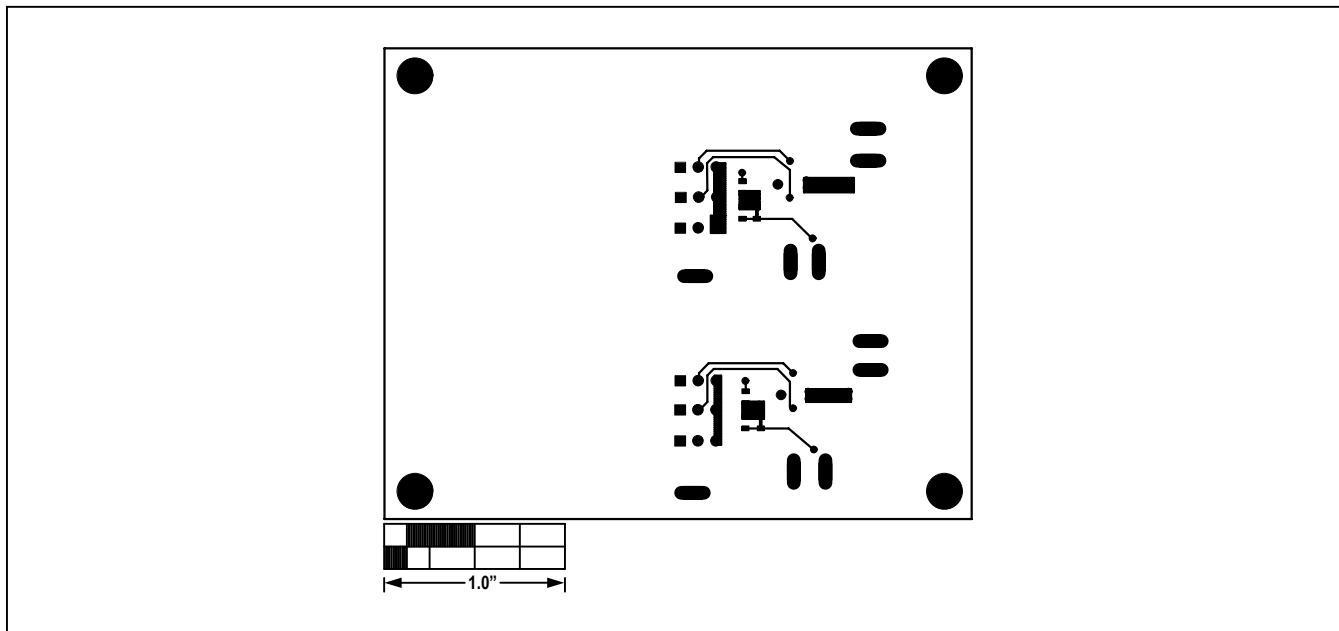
MAX1556 EV Kit PCB Layout—Solder Side
